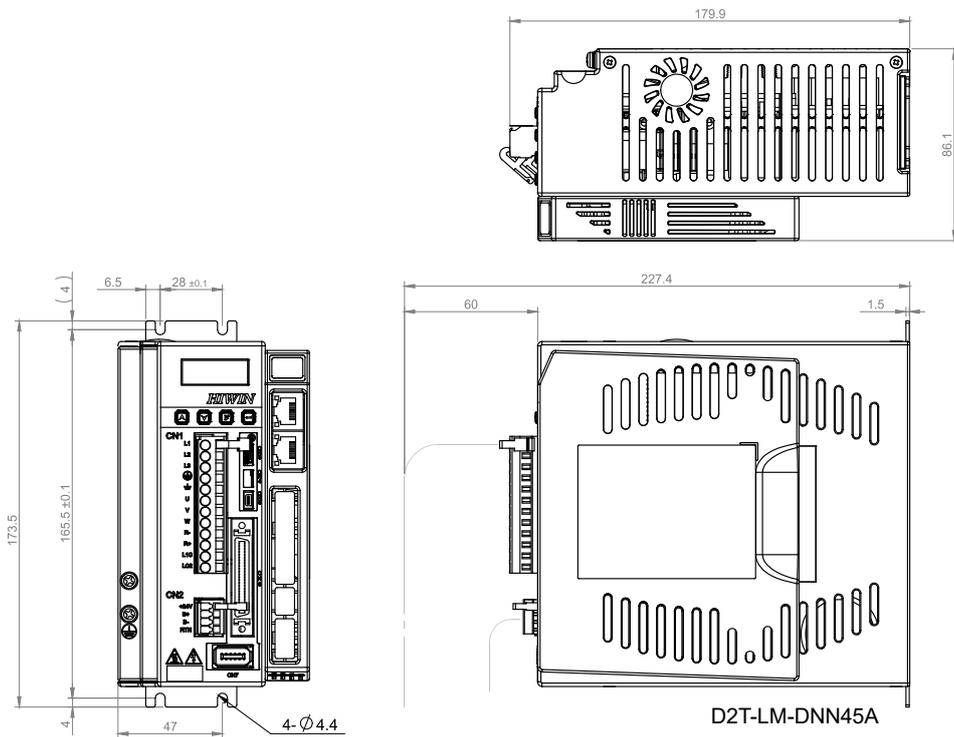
Dimensions of D2T-LM Frame C (Fieldbus)
